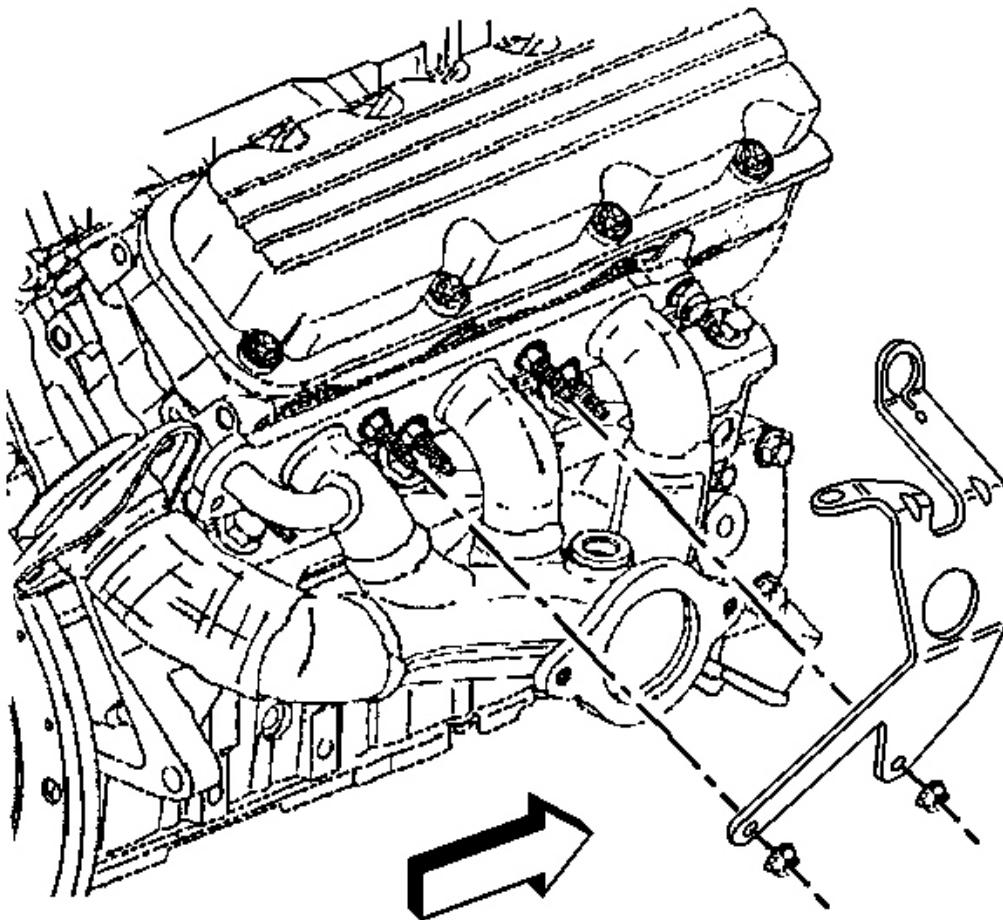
Locating Right Exhaust Manifold Components (Without A.I.R.)
